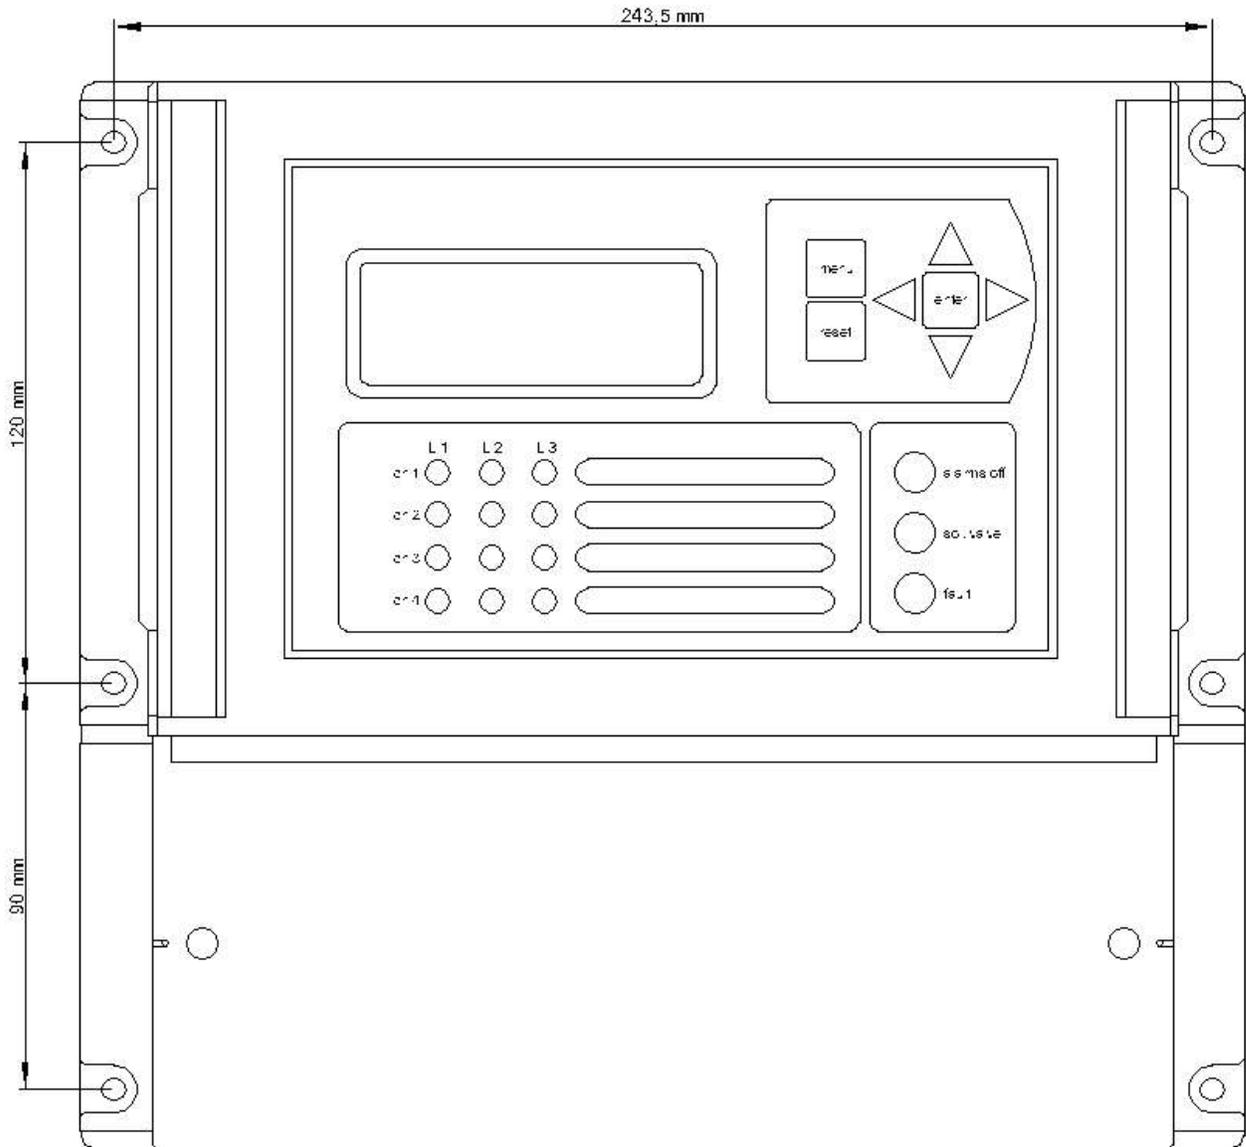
, SCAN20 gas detection controller general view and mounting dimensions. The photo is missing the bottom cable entry.
